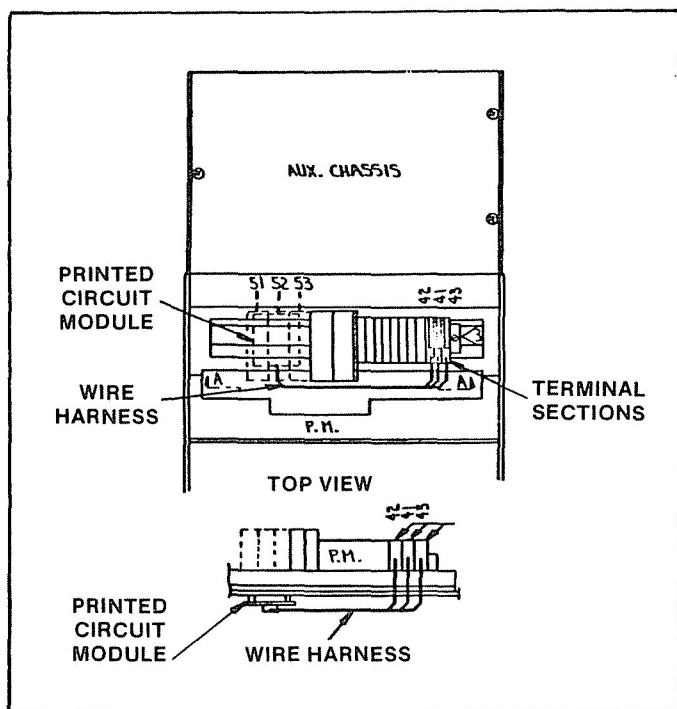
Mounting Location of Auxiliary Contact Kit 3-10 hp @ 230VAC
